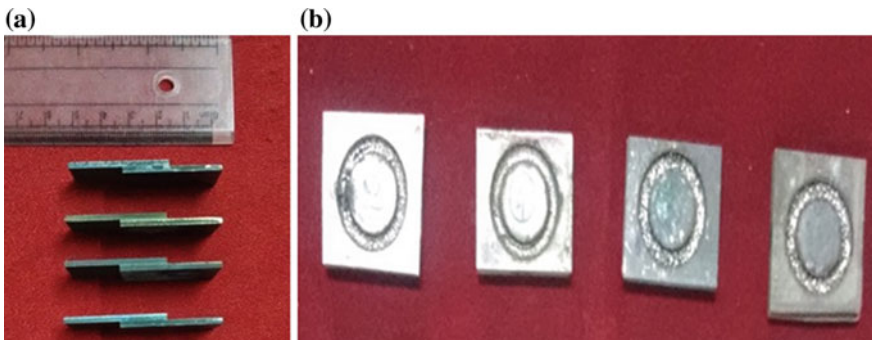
Fabricated before test specimen a Lap shear b Ram tensile tests
